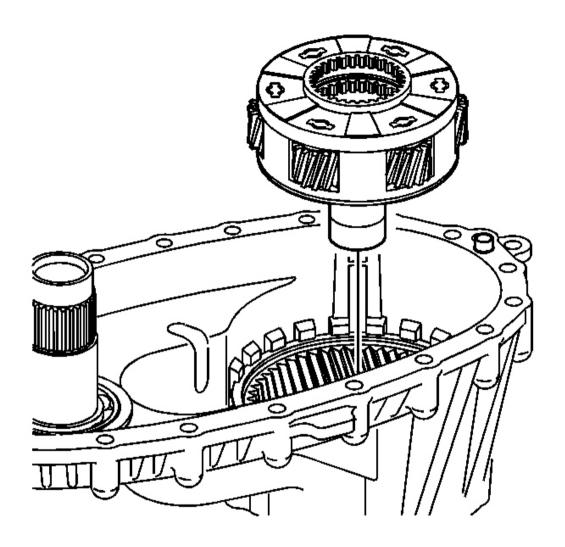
High/Low Planetary Carrier Courtesy of GENERAL MOTORS CORP.
